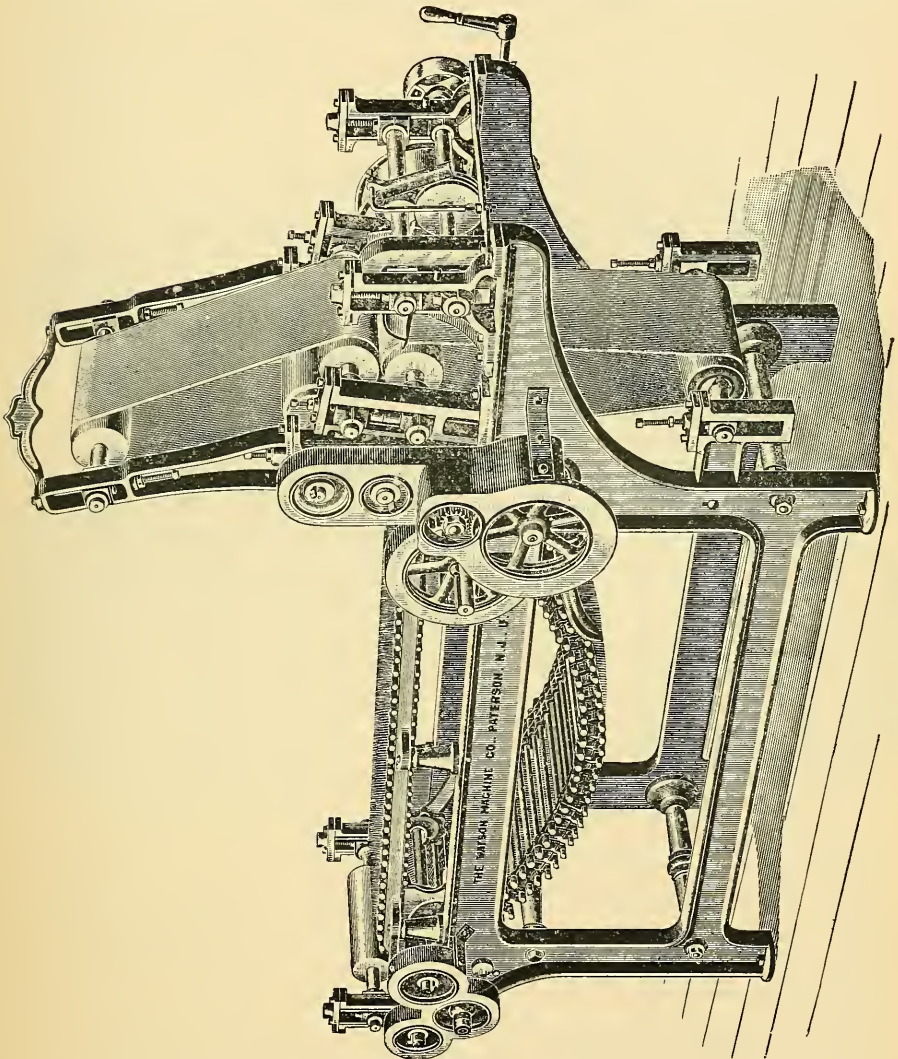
Apron head chain-bar drawing frame for Manila.
